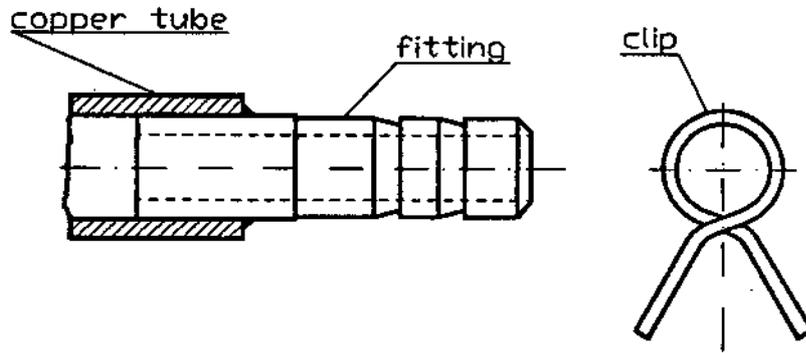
A Diagram of the Fittings Connecting the Collector / Flextube[®] and the Storage / Flextube[®].
